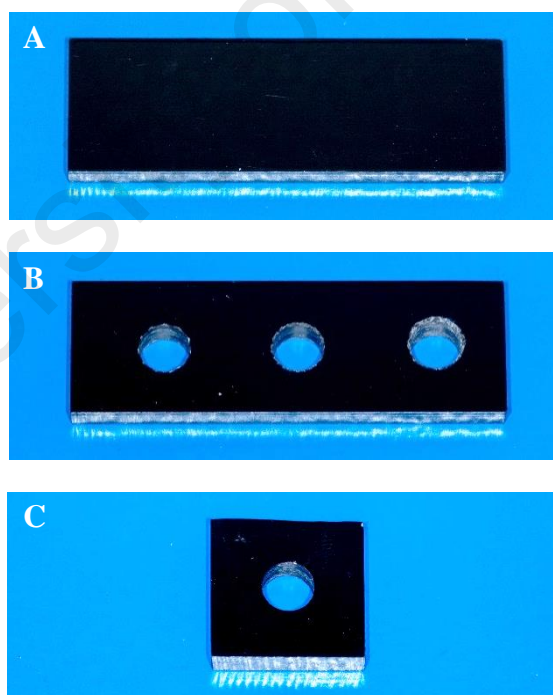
Steps of acrylic Perspex[®] mould preparation – A, Acrylic sheet (45 mm x 15 mm x 4 mm); B, Acrylic sheet with three 5 mm holes drilled; C, Final acrylic mould
